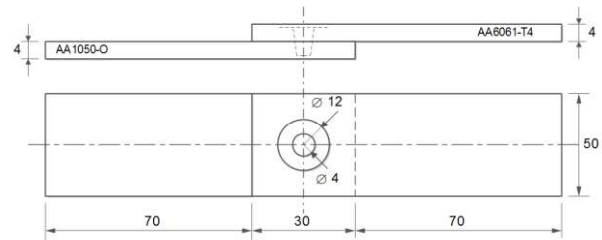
Tensile-shear testing specimen configuration (Dimensions in mm).
